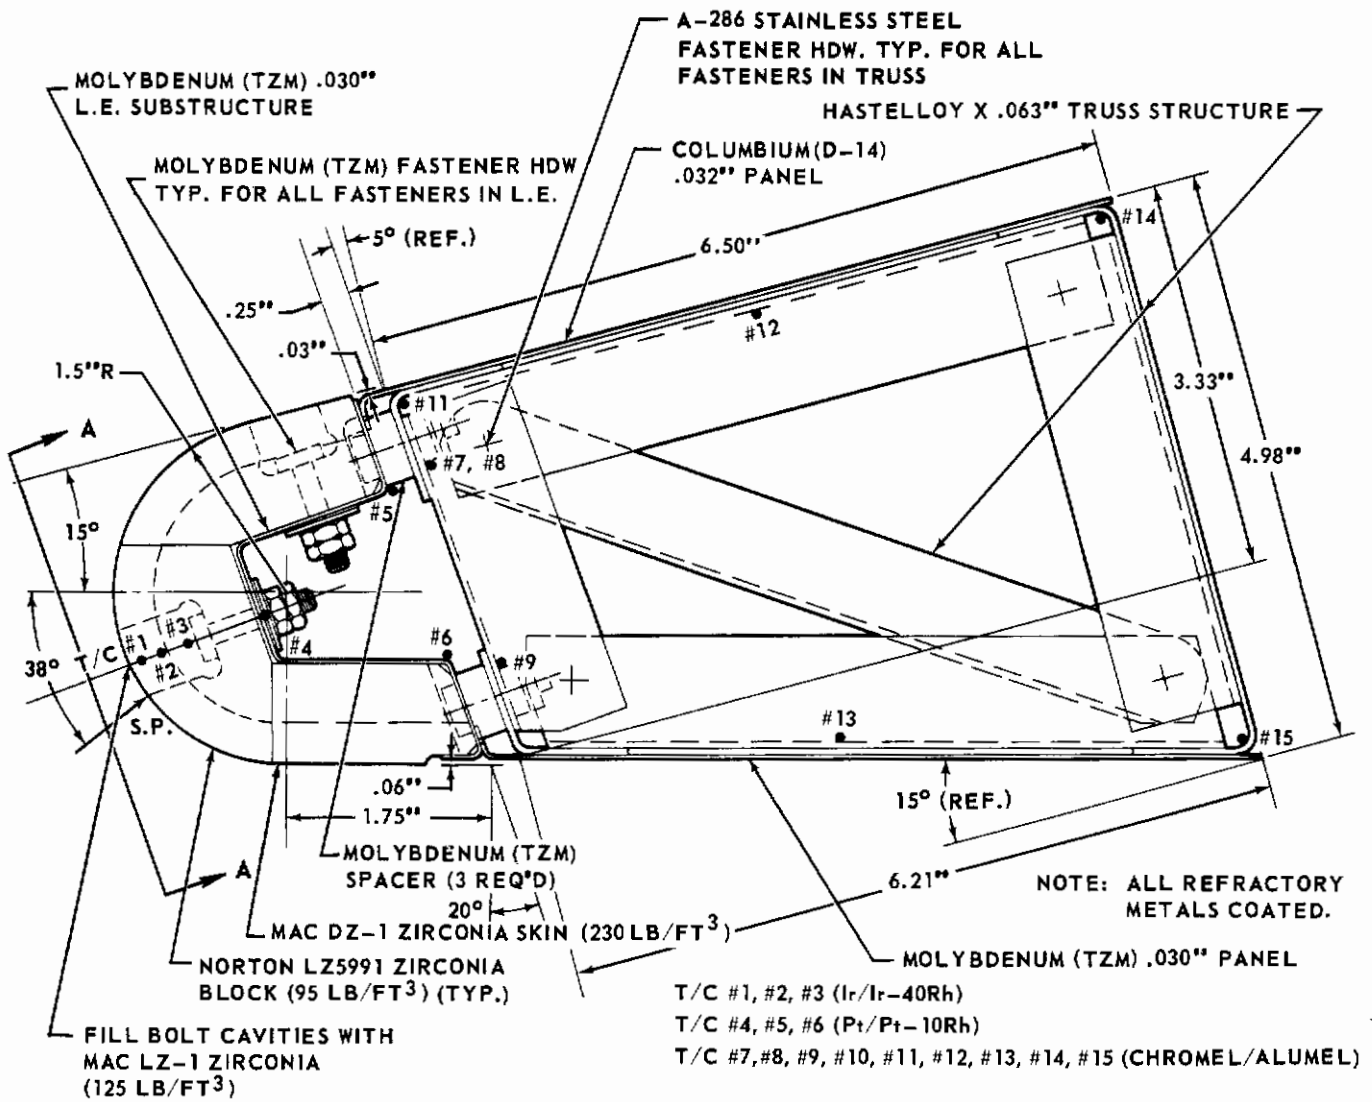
3.0-INCH RADIUS LEADING EDGE FINAL ASSEMBLY
